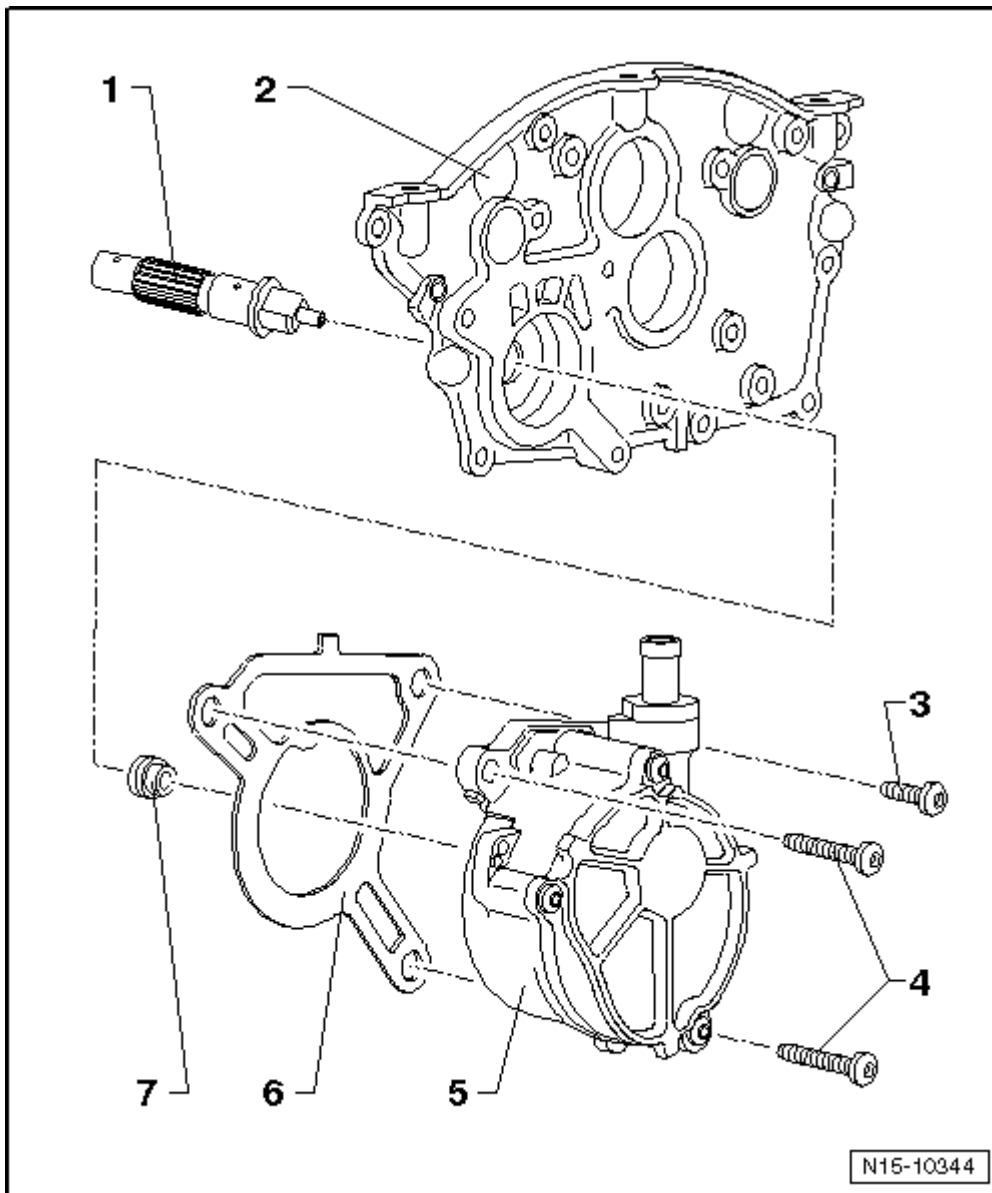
Mechanical Vacuum Pump, Assembly Overview
